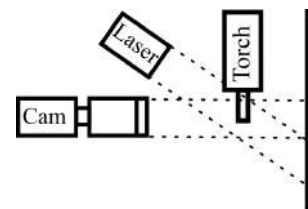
The technique of imaging using frontal illumination allows visualizing information of brightness and detachment of gases. Allows welding visualization within the butt welding joints.
